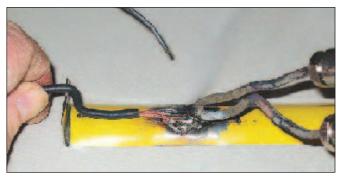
Soldering the #14 AWG stranded hookup wire to bare metal area.
